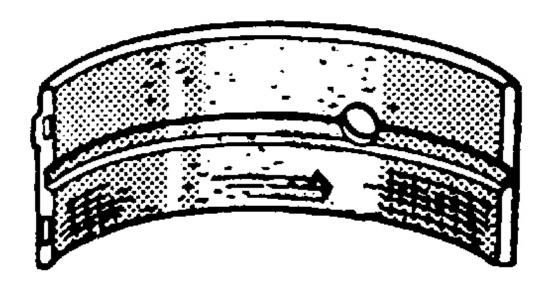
Identifying Connecting Rod Bearing Scoring Or Discoloration Courtesy of GENERAL MOTORS CORP.
